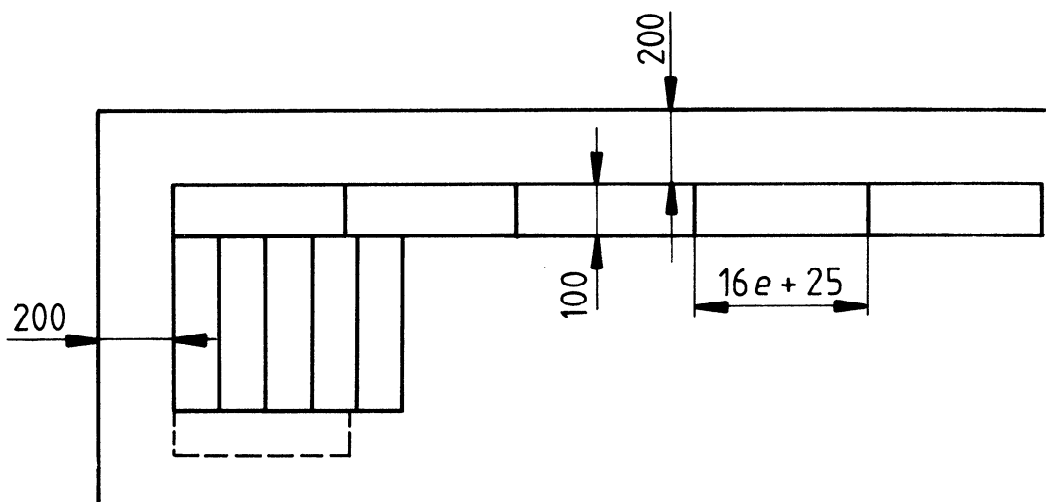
Sampling and dimensions of test specimens for mechanical tests
